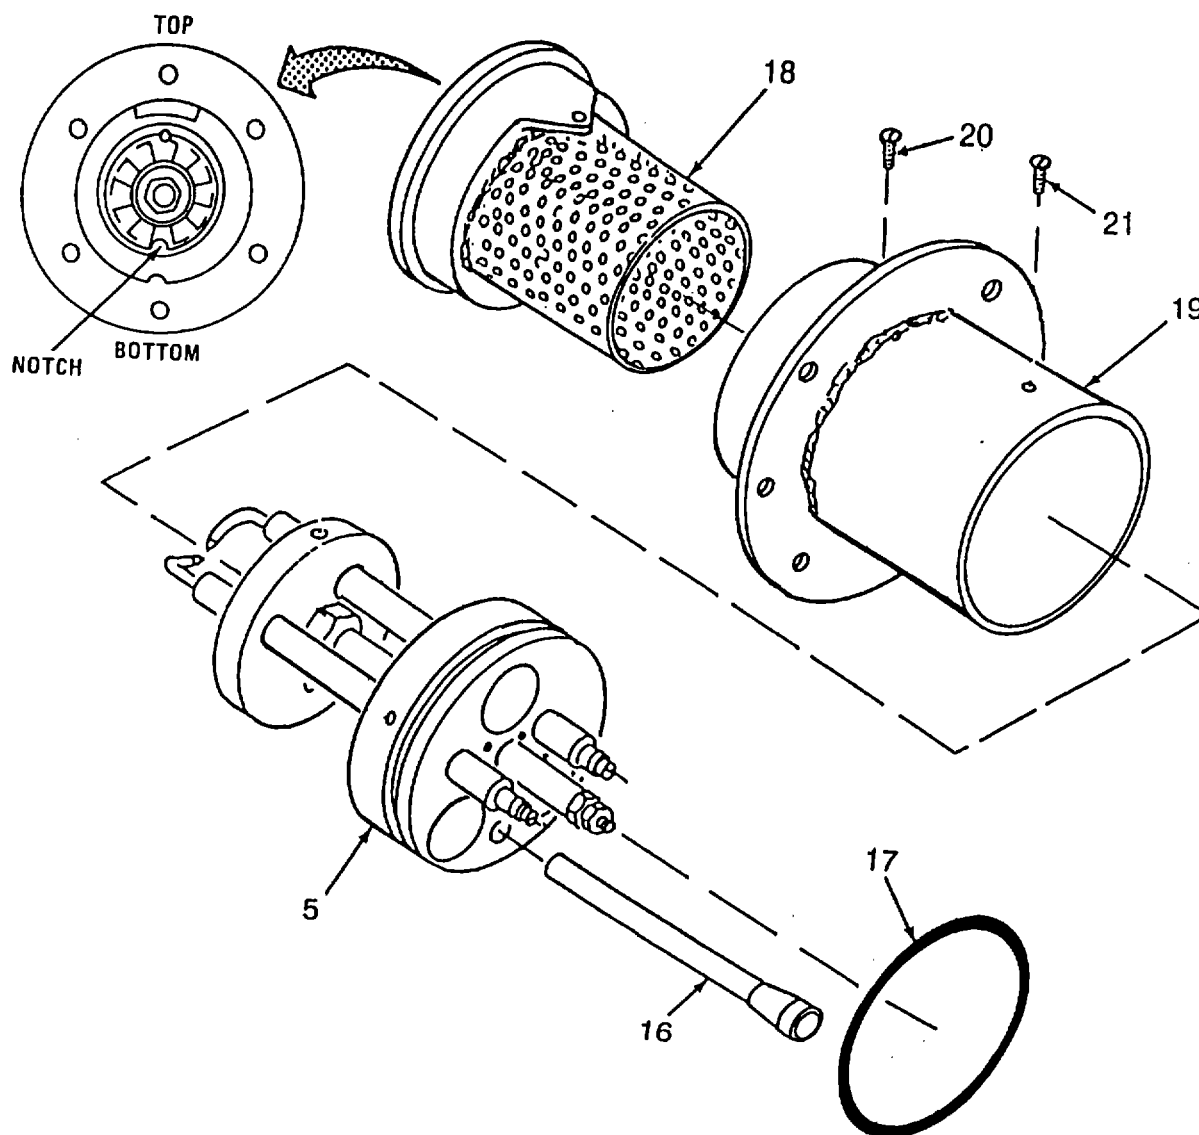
Burner Assembly (Sheet 5 of 5)
